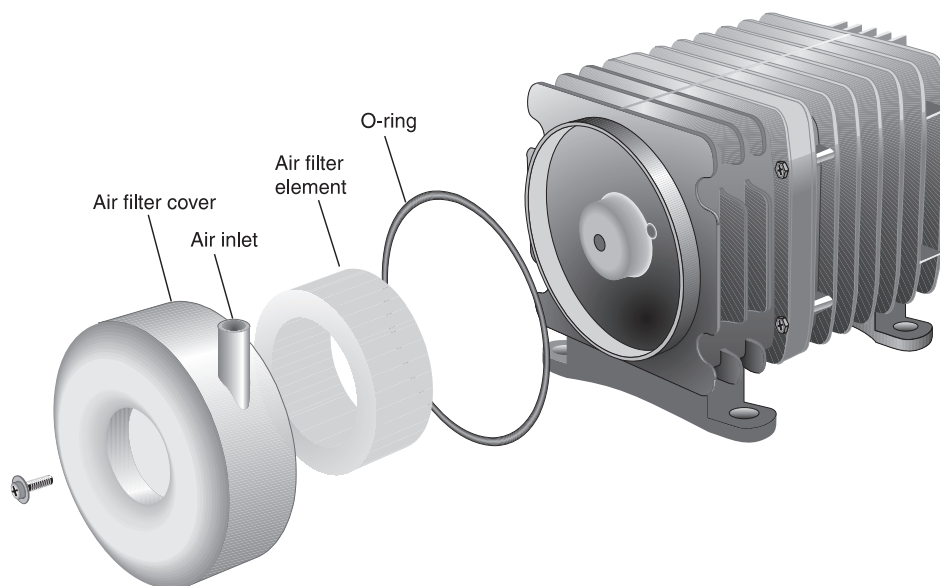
Inspecting Filter and "O" Ring in Air Vacuum Pump
